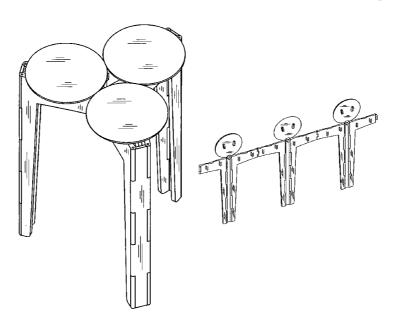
is a perspective view of the folding chair in a sixth partially unfolded position;
